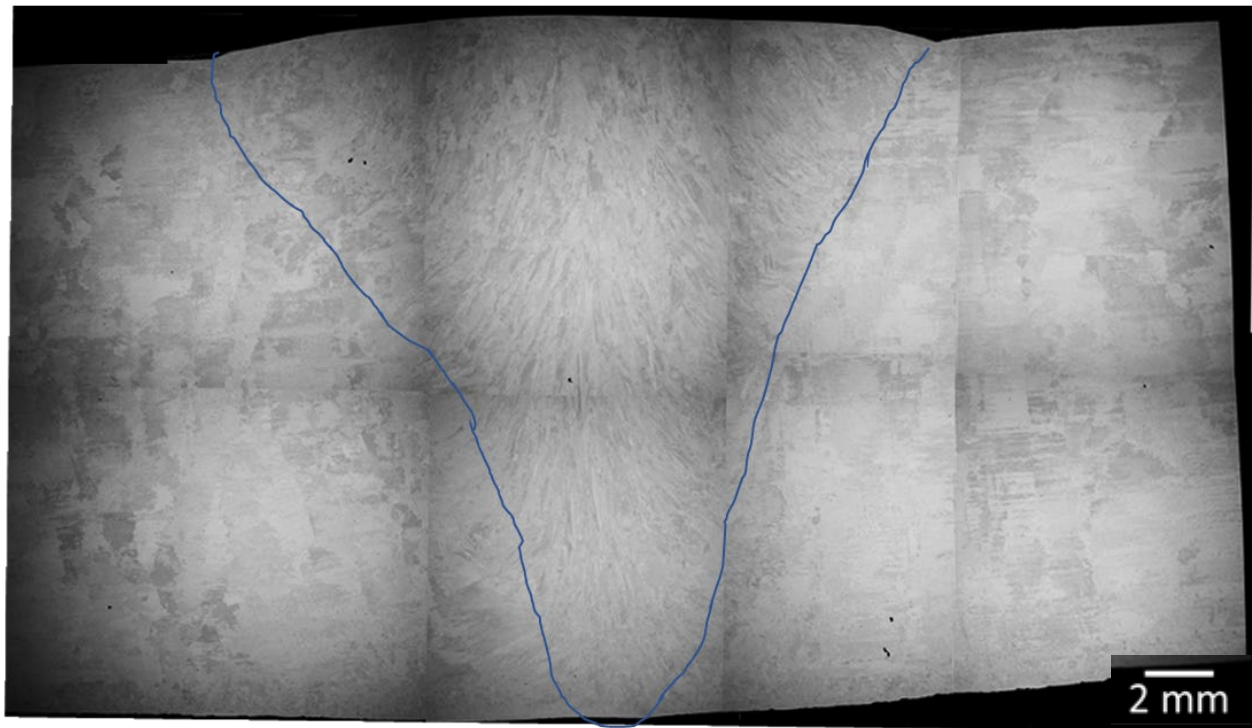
SEM image of the weld produced in the centrifugal cast pipe.
